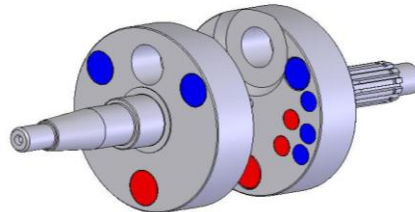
Example TM 125 K9-C / KZ10 crankshaft modification
